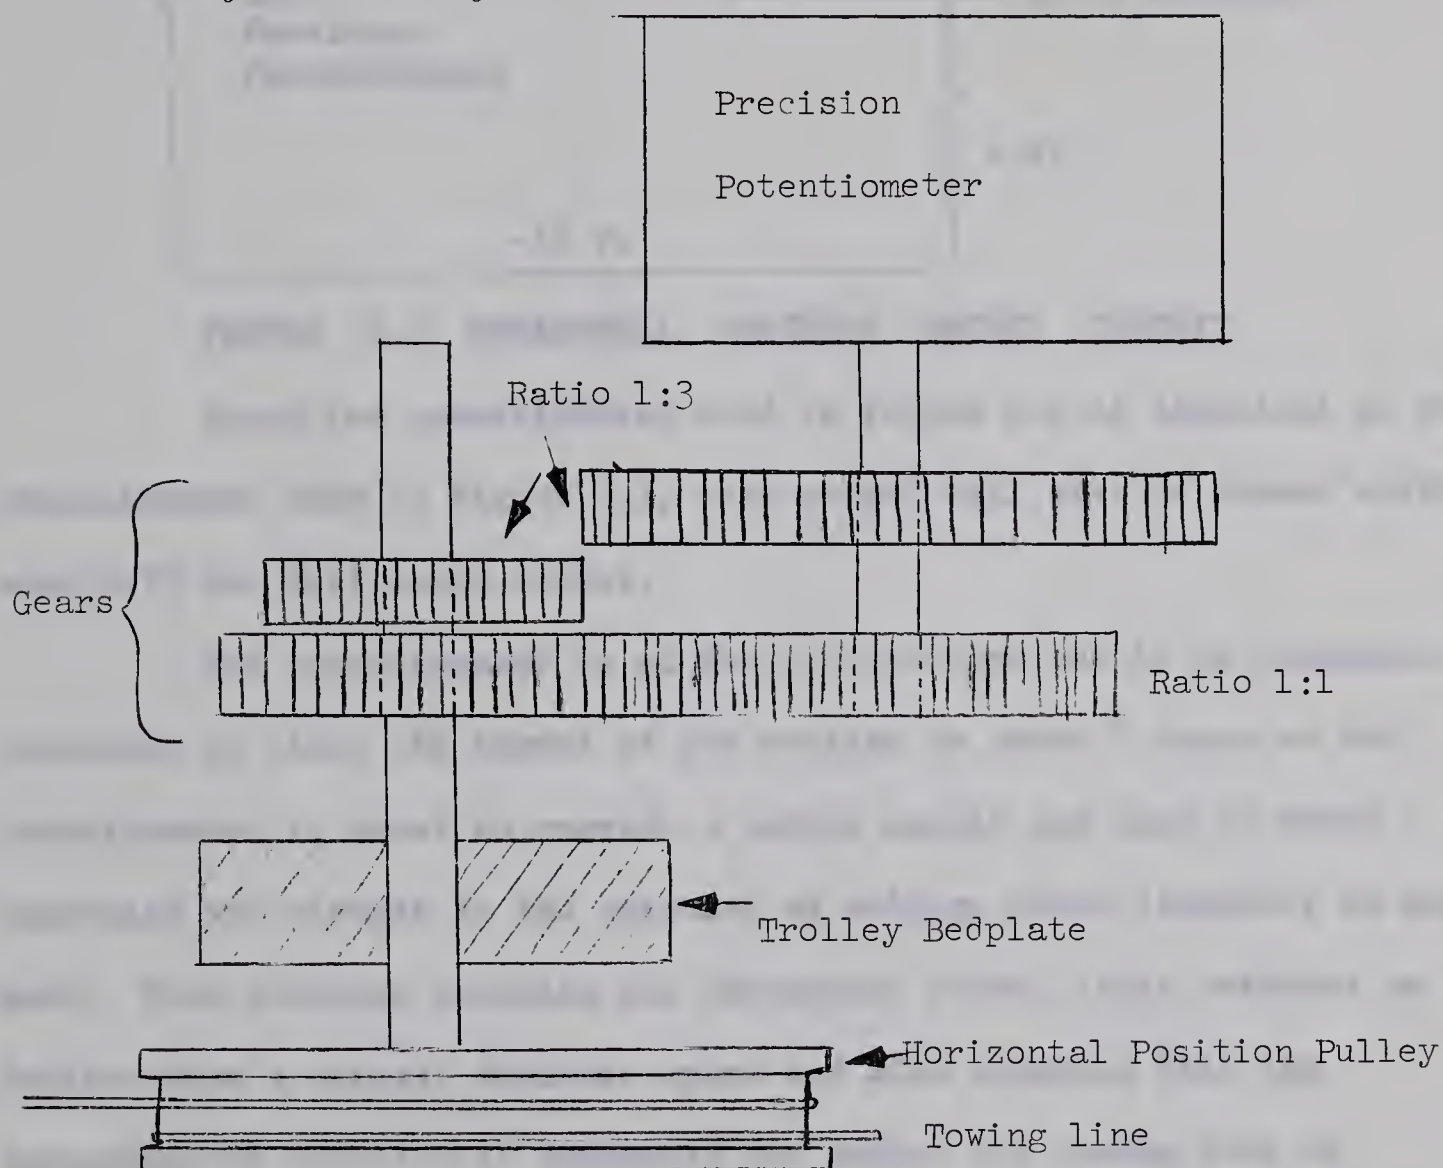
HORIZONTAL POSITION ASSEMBLY
